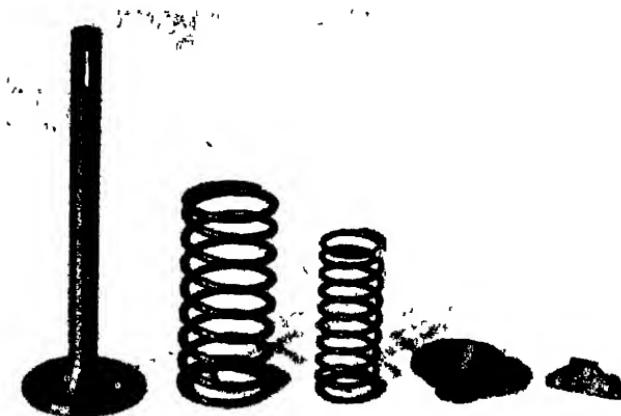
STANDARD OVERHEAD VALVE PARTS
